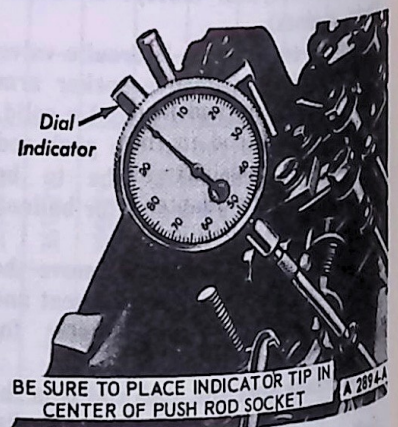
Typical Camshaft Lobe Lift—Mechanical Tappets
